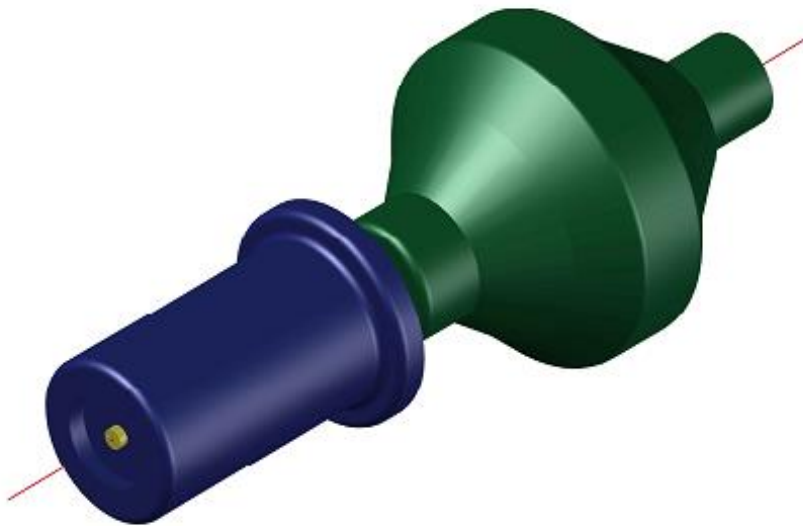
Self-Atomizing hydraulic nozzle (Complete View)
